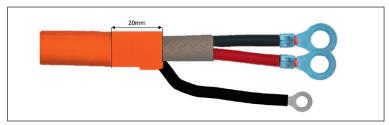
Two-core HV power cable: apply insulating tape to the marked section
